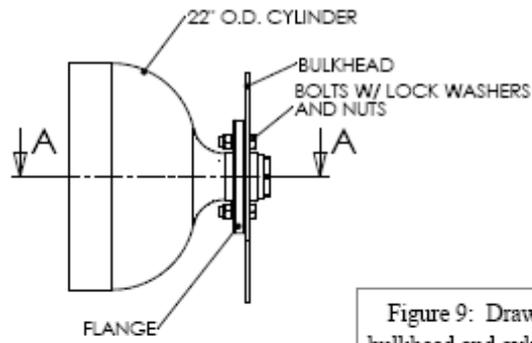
Drawing of MEGC bulkhead and cylinder attachment
